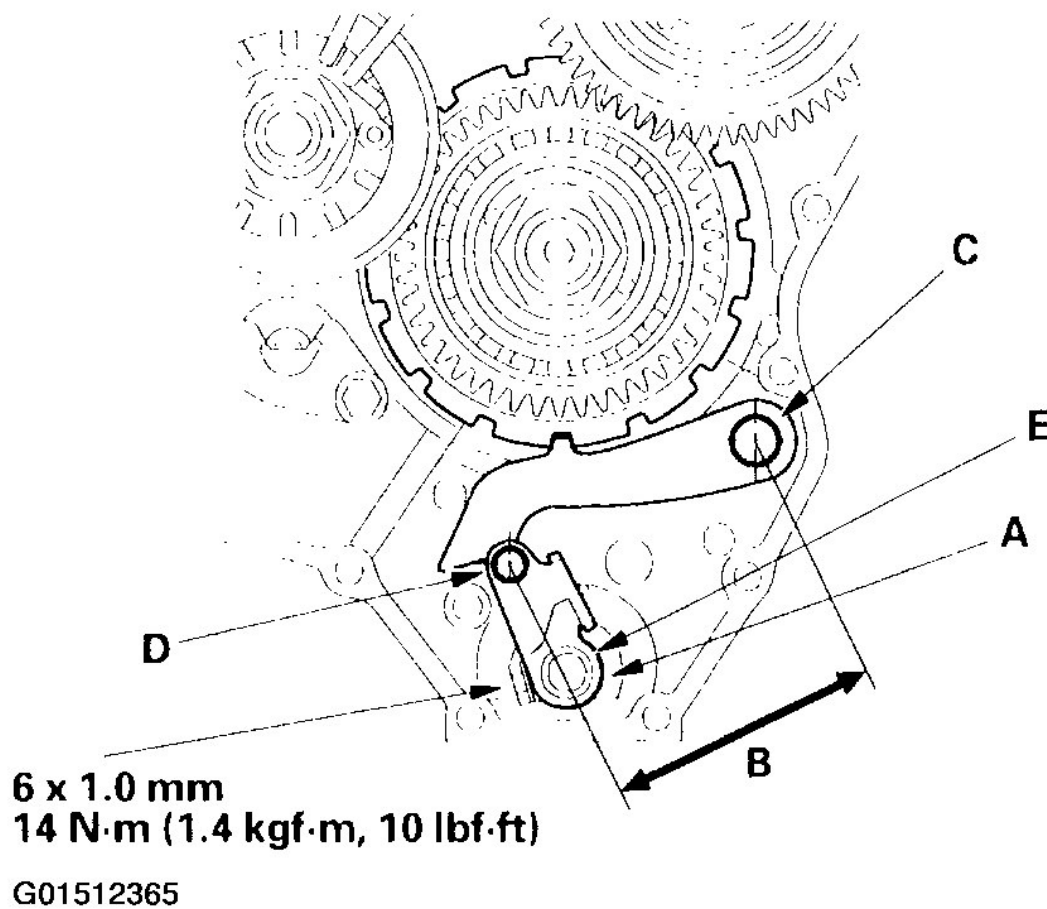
Setting Parking Lever in P Position With Torque Specifications
